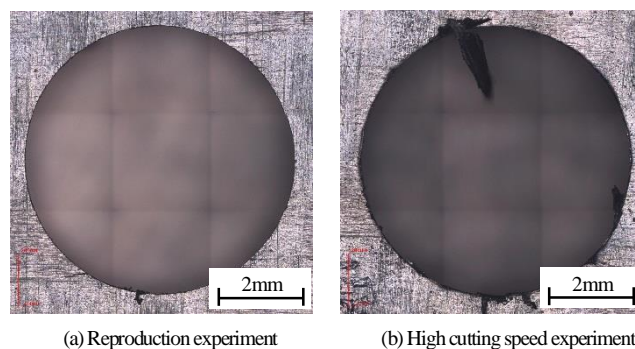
Appearance of drilled holes (bore #4, 2 flute, CFRTIP)
